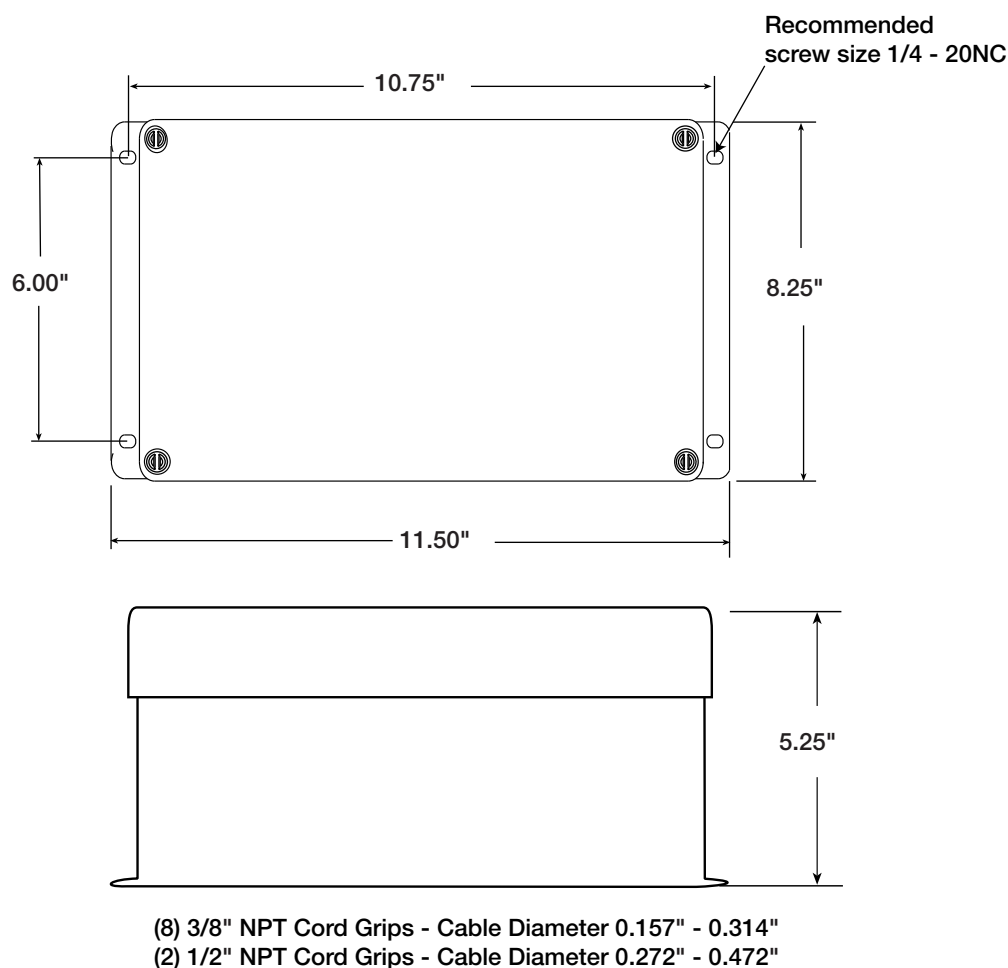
JB8SP and JB8SPT Enclosure Dimensions
